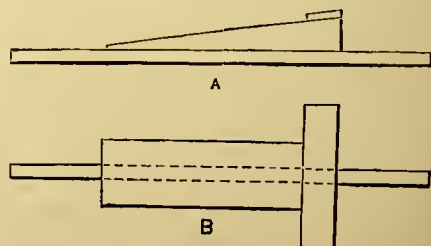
INCLINED BLOCK FASTENED ON SLIDING SLIP FOR PINS. A, Side view or elevation; B, Plan.
